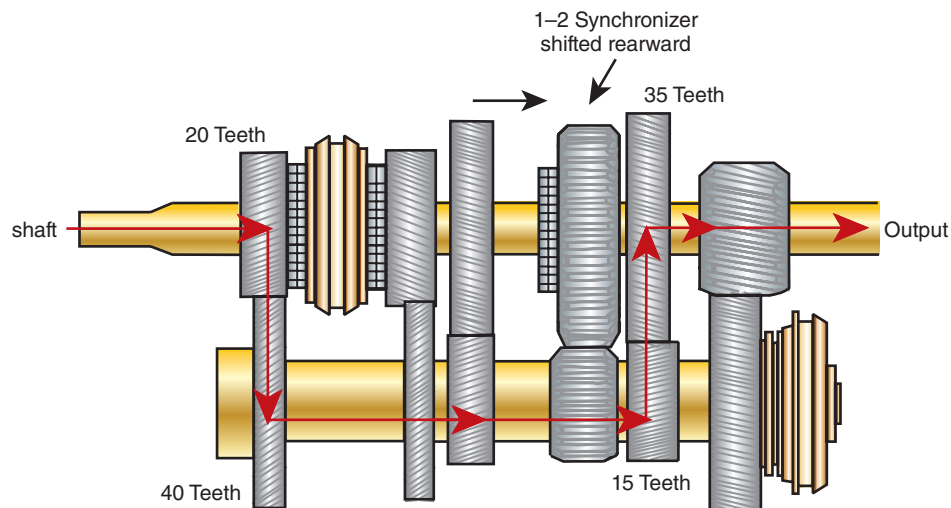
Overall gear ratio for first gear is determined by both sets of gears in mesh.
